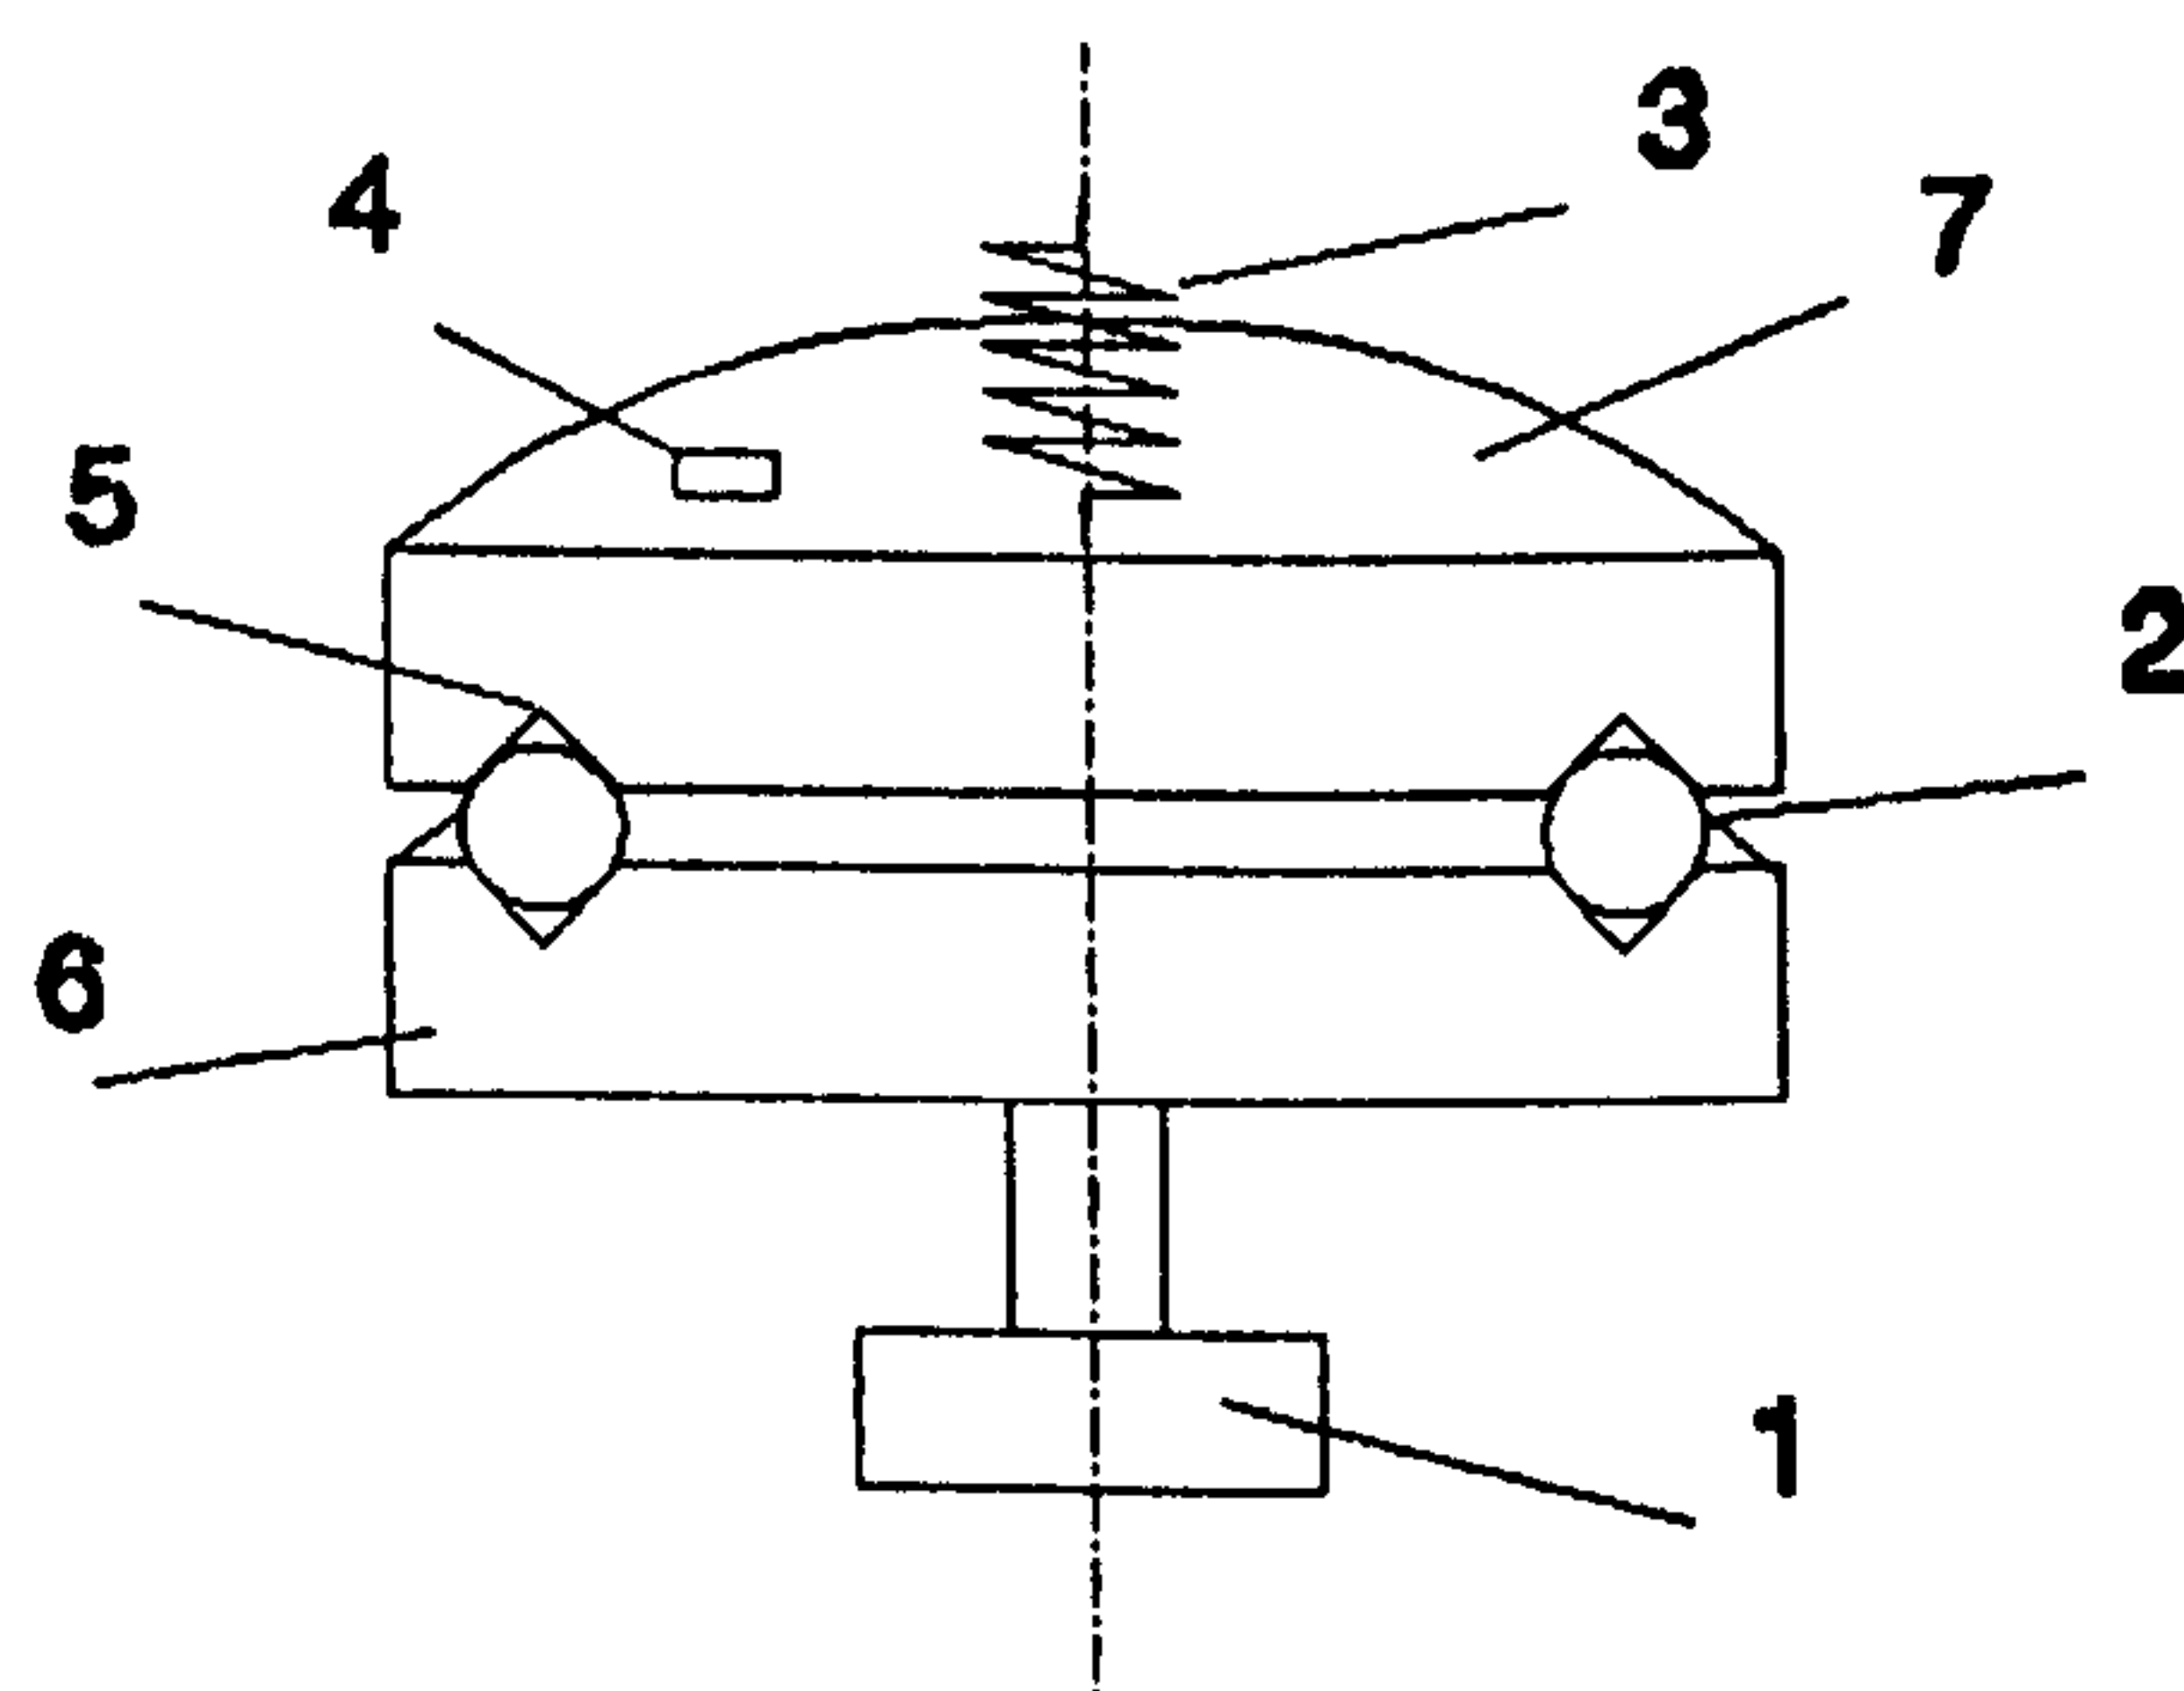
Ceramic ball grinding apparatus: 1,drive-motor; 2,ceramic balls; 3,spring load; 4,micro-switch cut-out; 5,'V'-groove; 6,rotating plate; 7,stationary plate.
